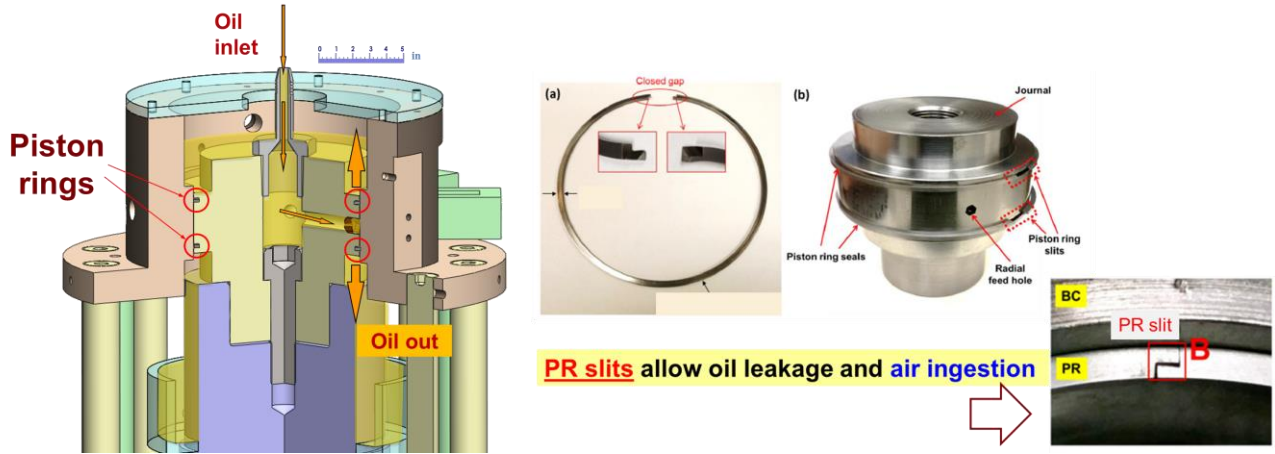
PR-SFD: 3D cross section with lubricant flow path and views of journal and piston rings installed.
